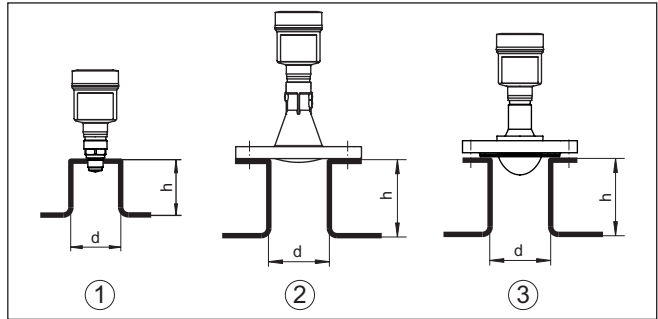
Socket mounting with deviating socket dimensions with different versions of VEGAPULS 64
